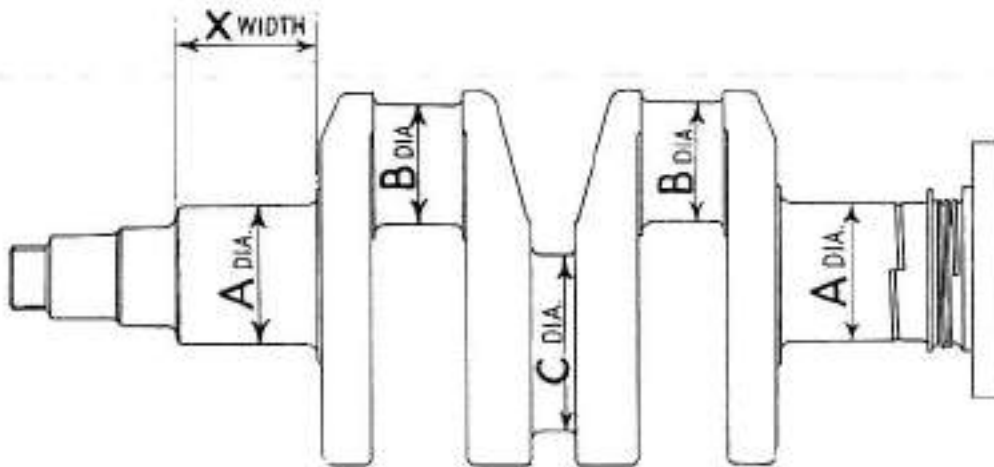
CRANKSHAFT REGRIND DIAGRAM
